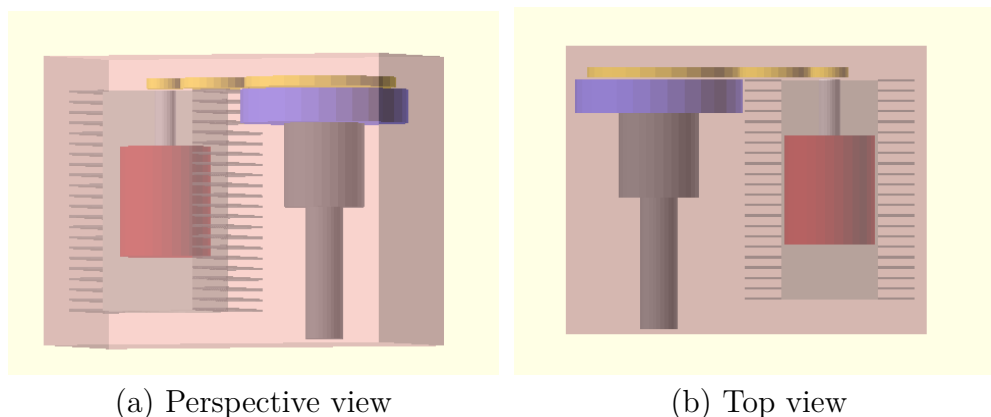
Resulting geometry of Aileron EMA for gear drive configuration.
